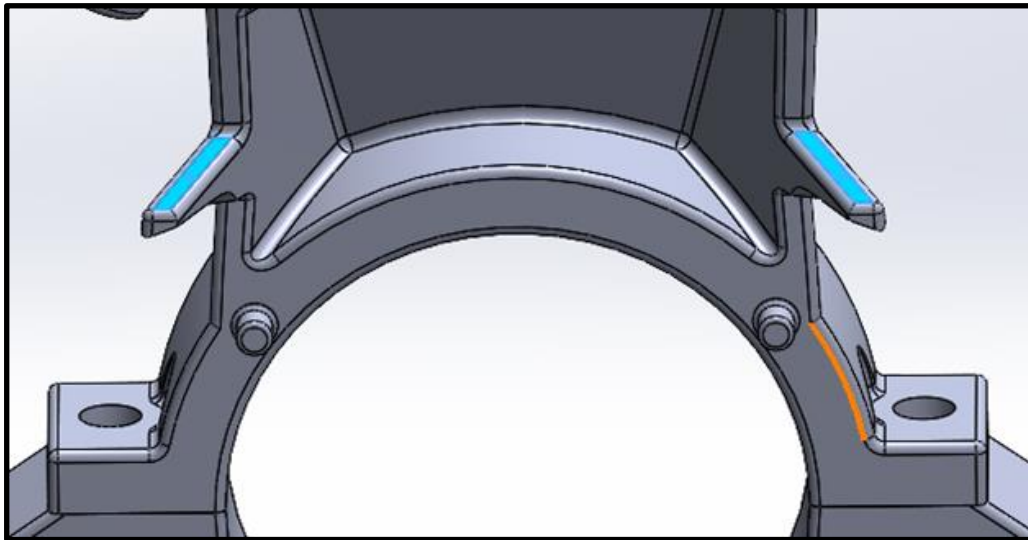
Anti-slip extrusions developed for the final design to lock the assembly to the base
